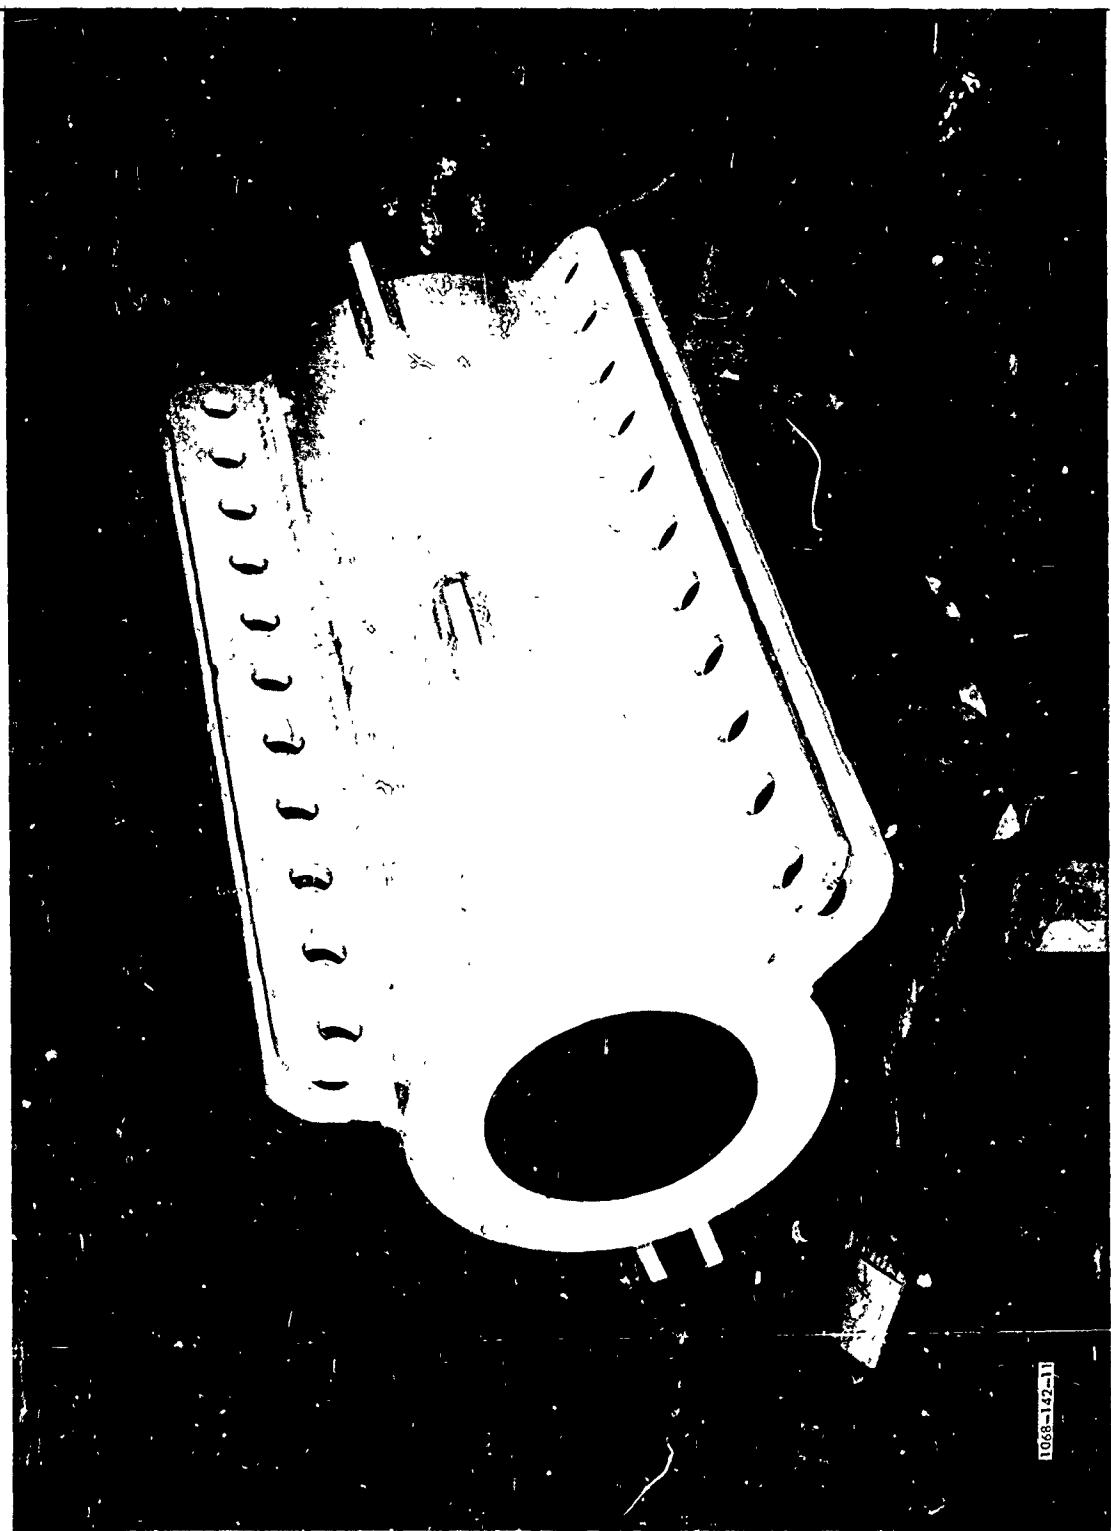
Barrel Assembly. (Sheet 1 of 2)
